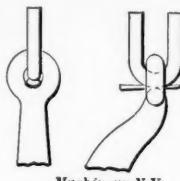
A Kink when Welding Link connecting Hook and Chain.
